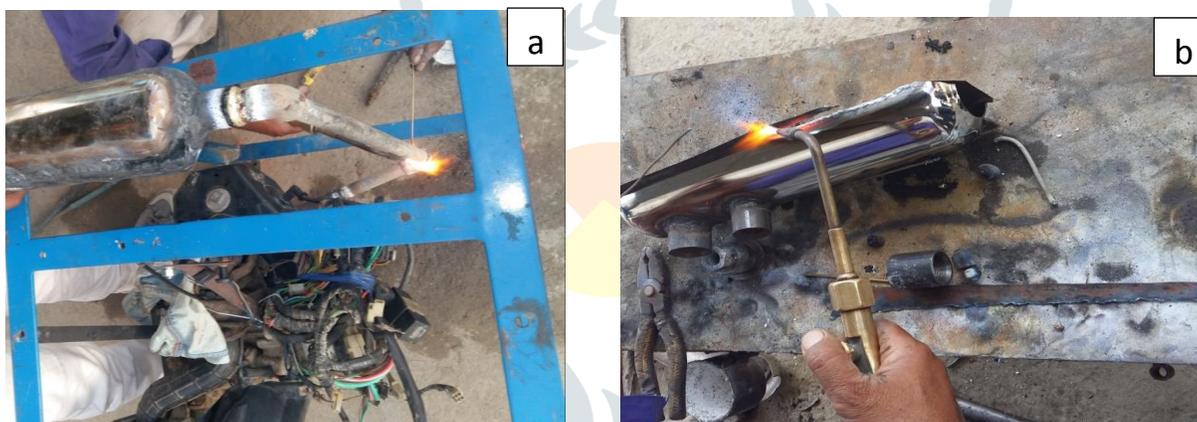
(a) Exhaust pipe welded to the engine (b) Silencer being welded
